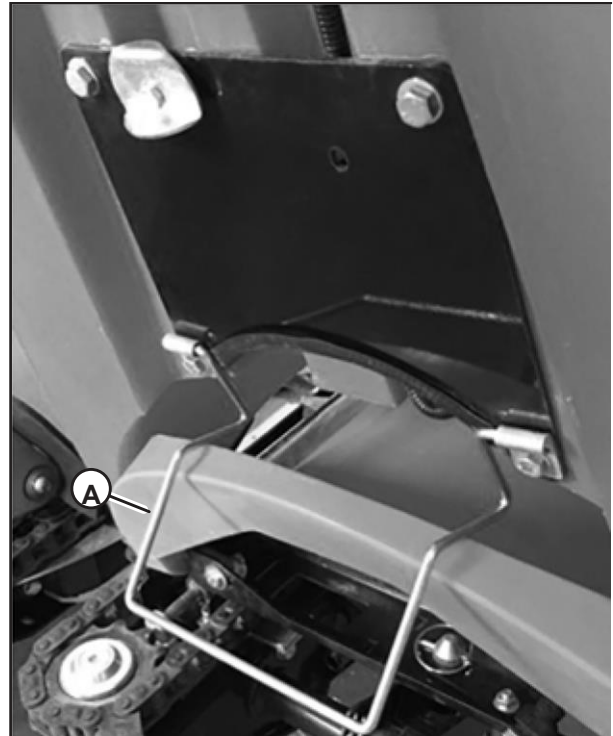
Wire Bracket Support Installed on Front Snout – Raised Service Position
